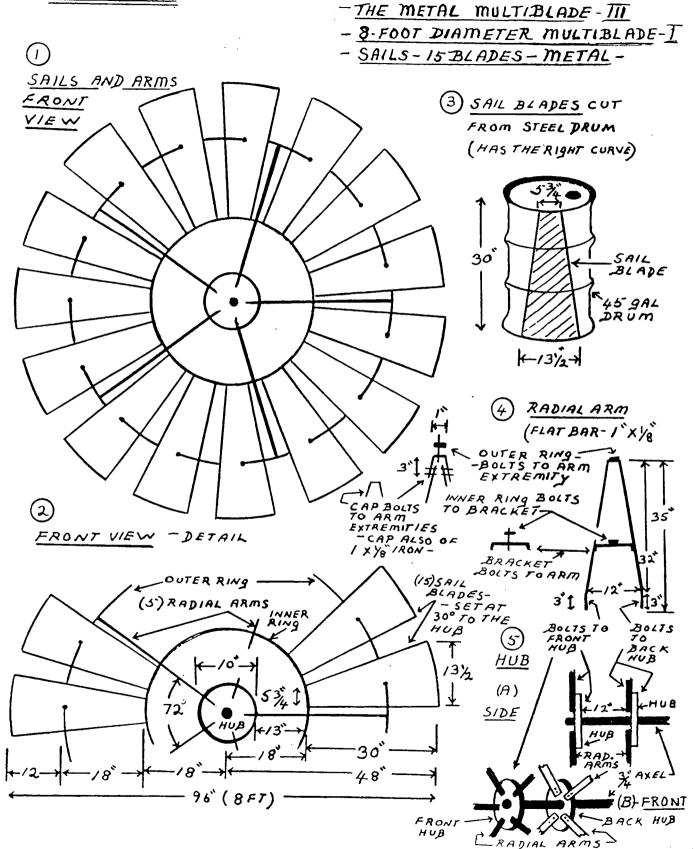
The sails are connected to the inner and outer rings by brackets made out of pieces of angle iron, (fig. 1, 2, 3, 4 and 5).
